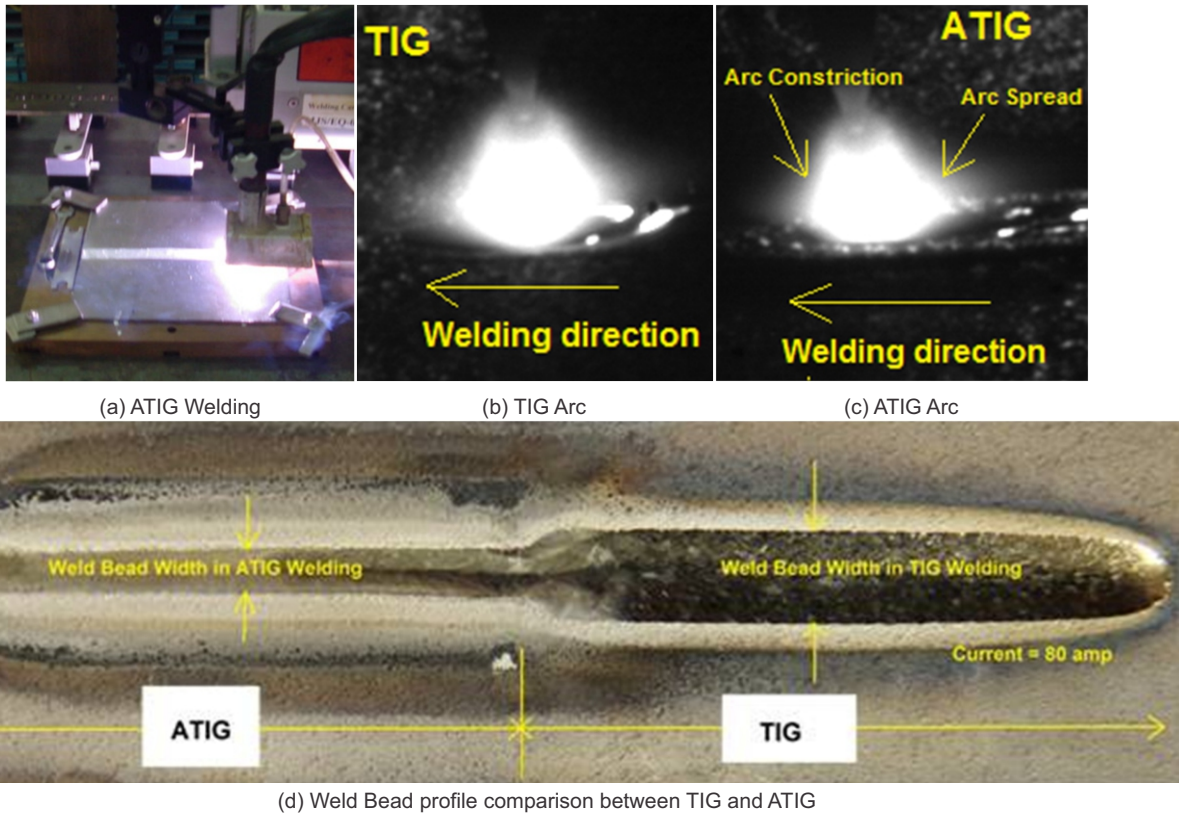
(a)ATIG welding of titanium in progress, (b) & (c) TIG and ATIG Arc images captured using high speed camera, and (d) weld bead comparison between TIG and ATIG welding.
